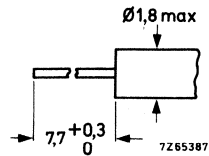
Wire diameter greater than 1 mm (max. 1,8 mm).
